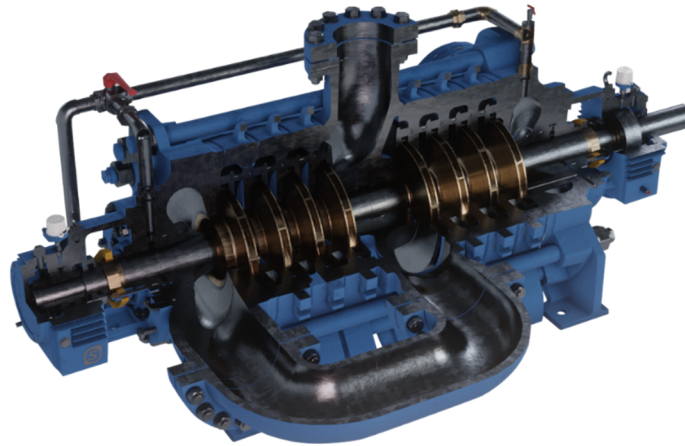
Section view of impeller between-bearing type pump (BB4) multistage opposed impeller arrangement (courtesy of Scamont Engineering)
